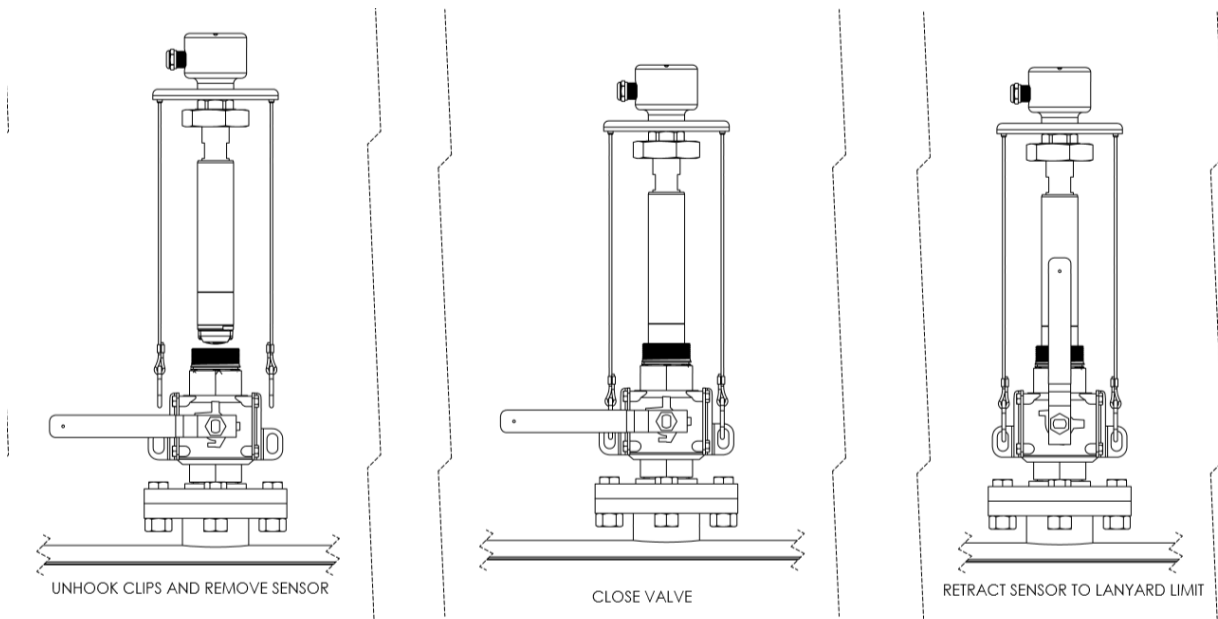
Remove sensor from Hot Tap Valve (Sequence Right to Left for removal)
